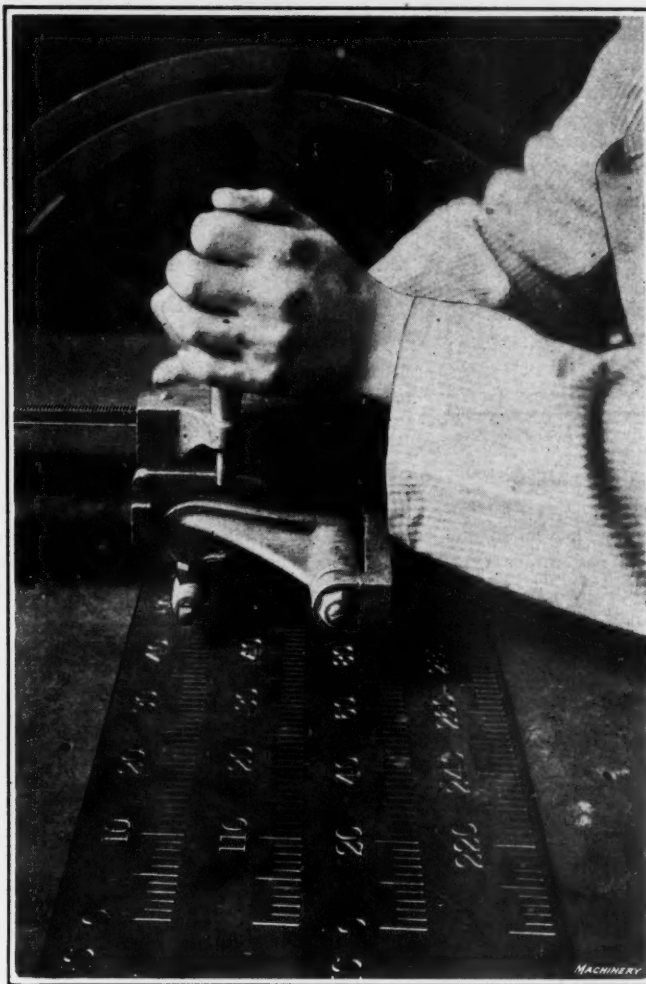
Close View of Graduating Tool used on Machine shown in Fig. 15
